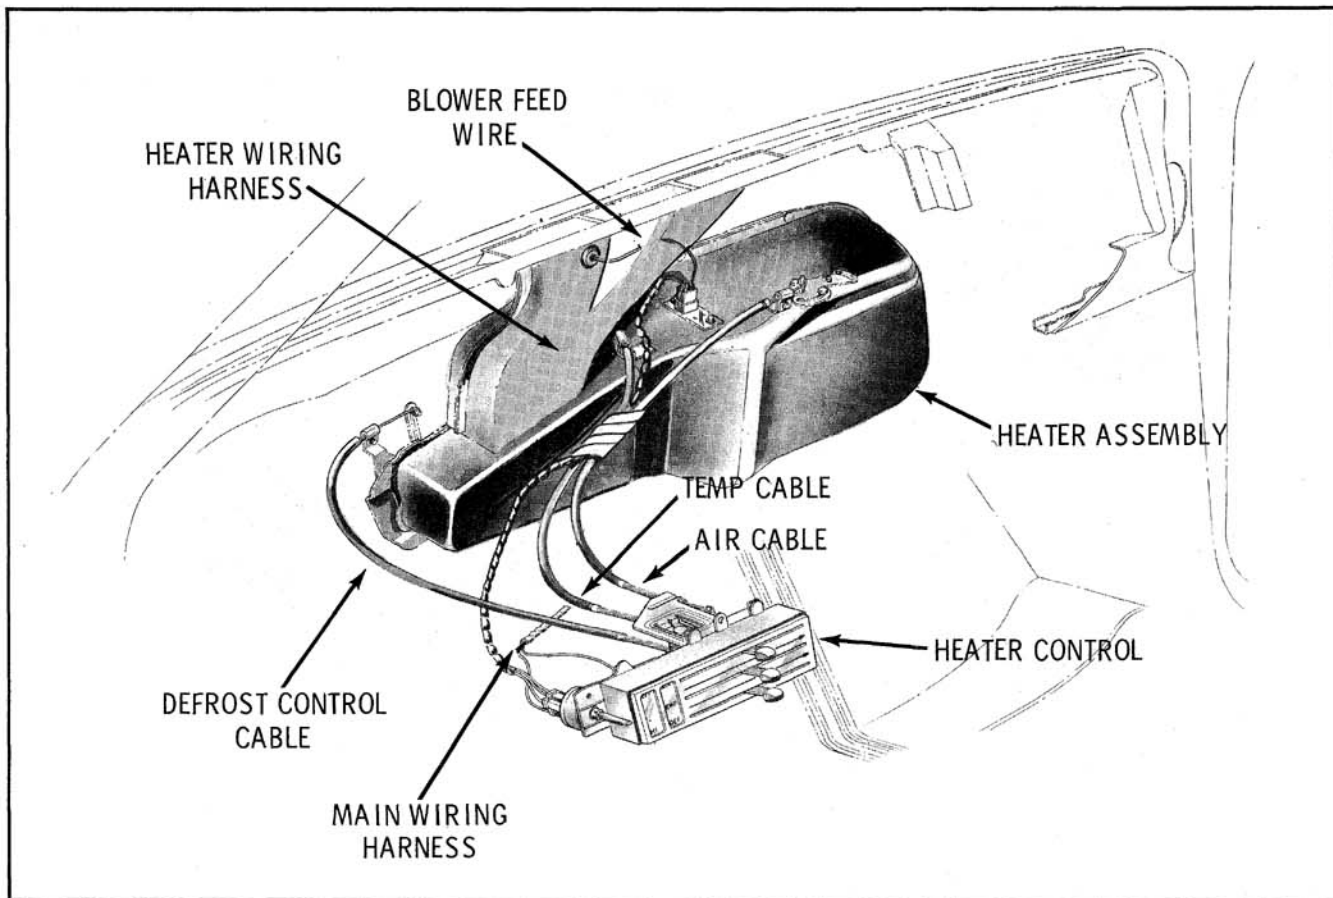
Cable and Wire Routing (33 through 38 Series)
